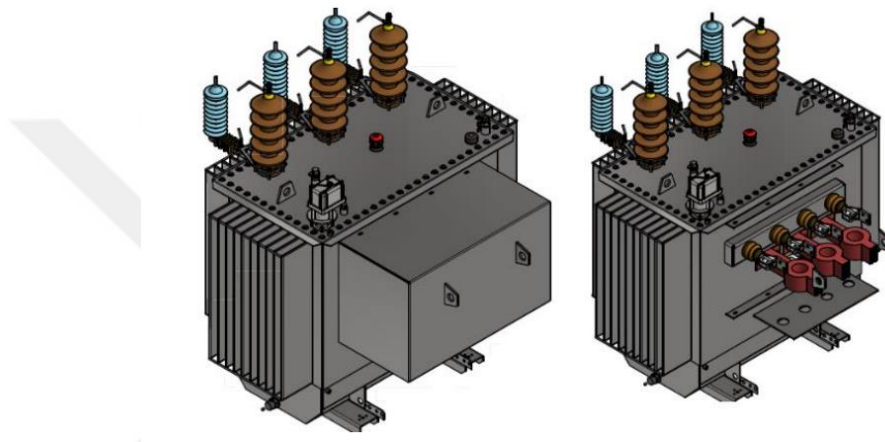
CSP transformer draft drawings (cable box closed on the left, open on the right).
